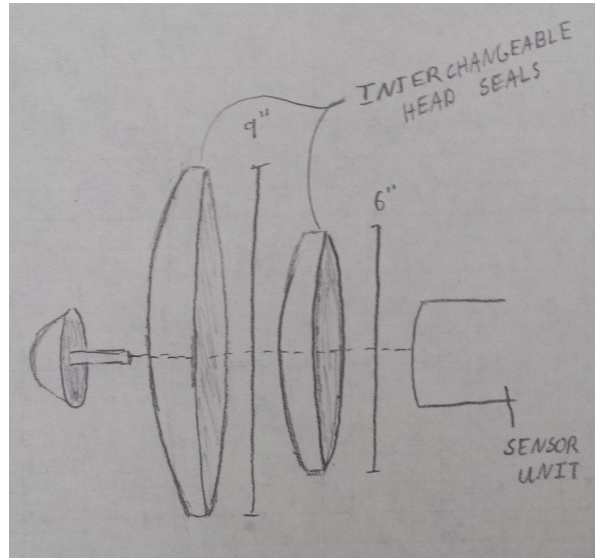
Interchangeable head seals for hydraulically power
